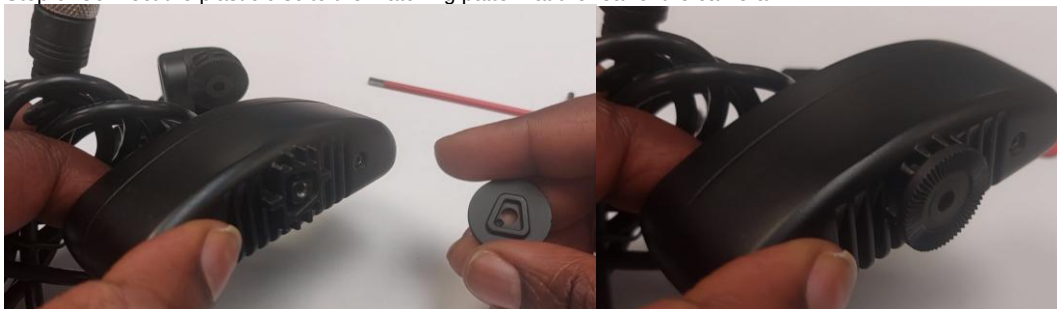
A-Pillar Mounting Bracket, fitting the plastic disc to the rear of the camera with the same shaped pattern/groove.
